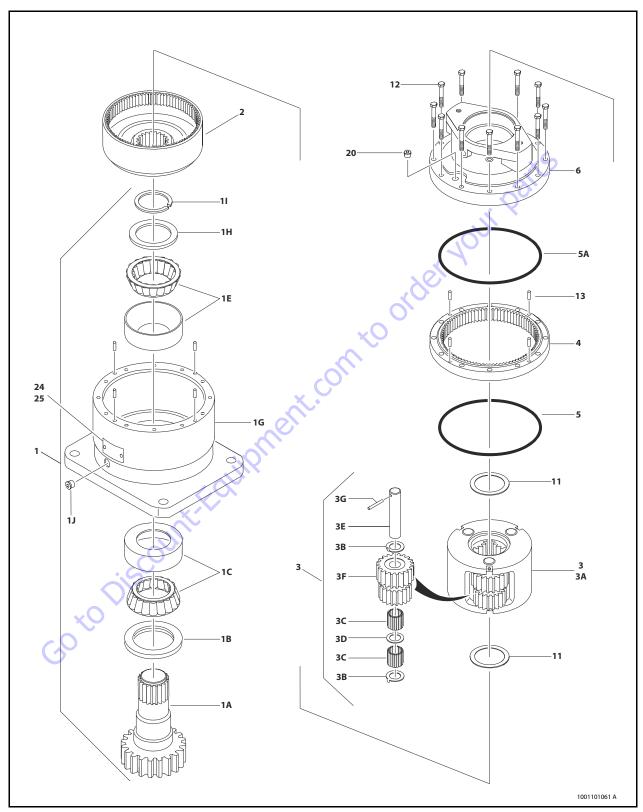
Swing Motor/Brake/Hub Assembly (USA Built Machines, SN 0300137441 through 0300171769 and China Built Machines, SN B300000100 through B300000969) - Sheet 1 of 3
